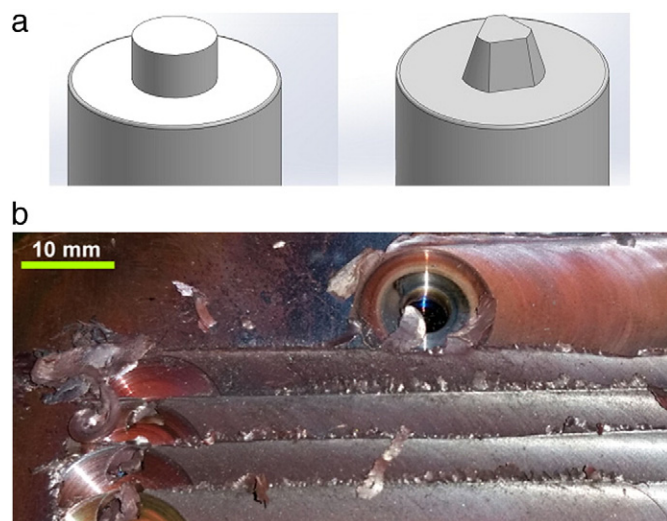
(a) Schematic illustration of the tool geometry, (b) photo of the Cu/steel FSW multi-pass lap joint surface.
